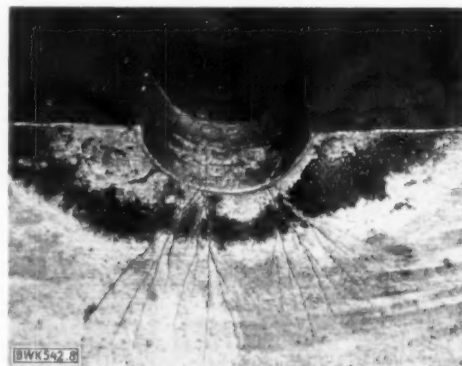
Cracks by stress corrosion of the sharp bare edge of a welded vent
